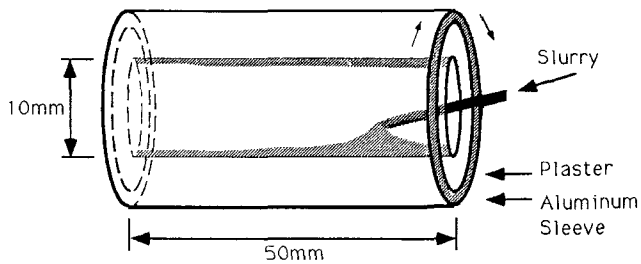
Schematic diagram of centrifugal slip casting mold assembly.
